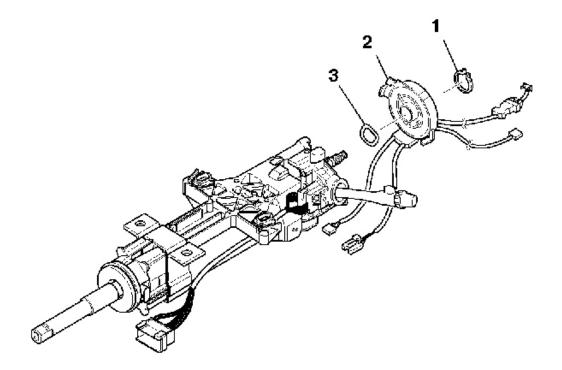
Identifying Steering Wheel Module Coil Courtesy of GENERAL MOTORS CORP.
